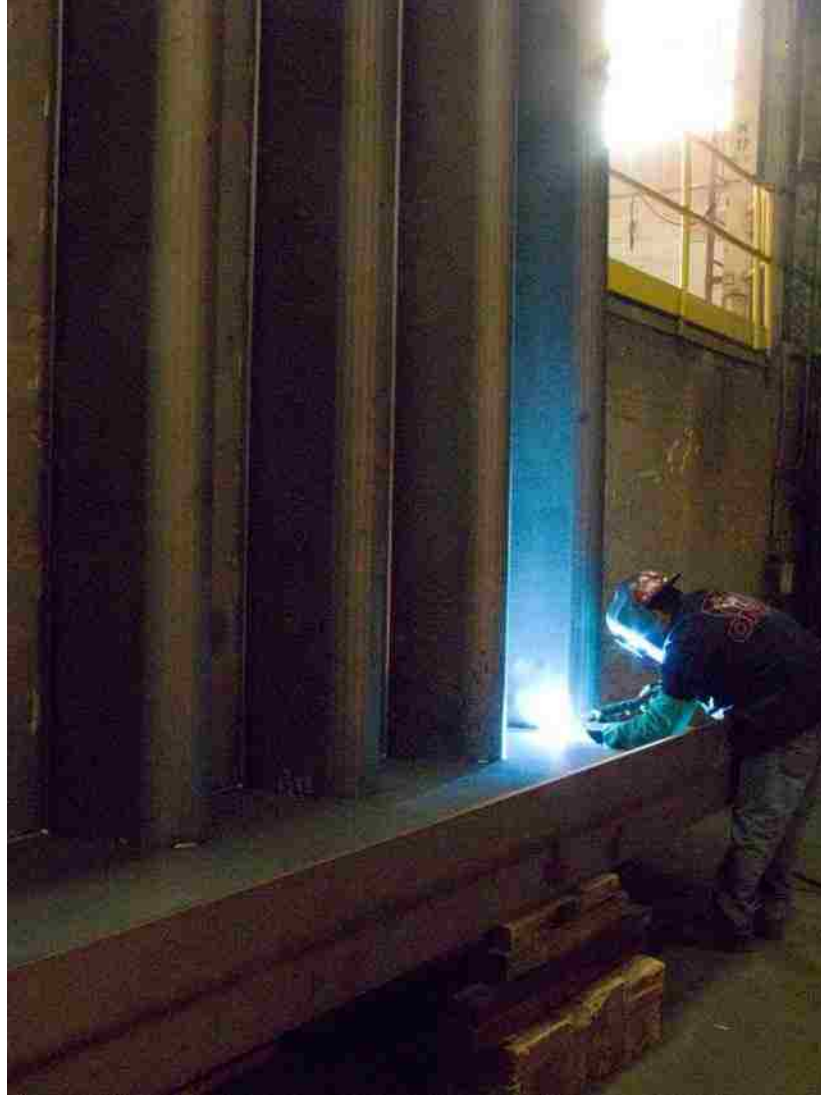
Manual welding rib-to-floor beam connection (reproduced from Mukherjee 2016)
